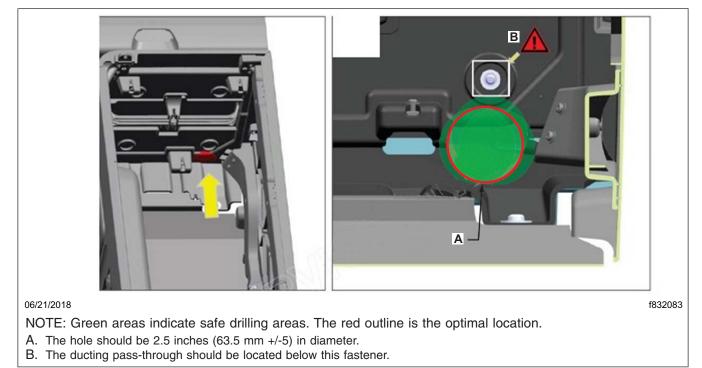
, Locating the Flex Ducting Pass-Through Hole
